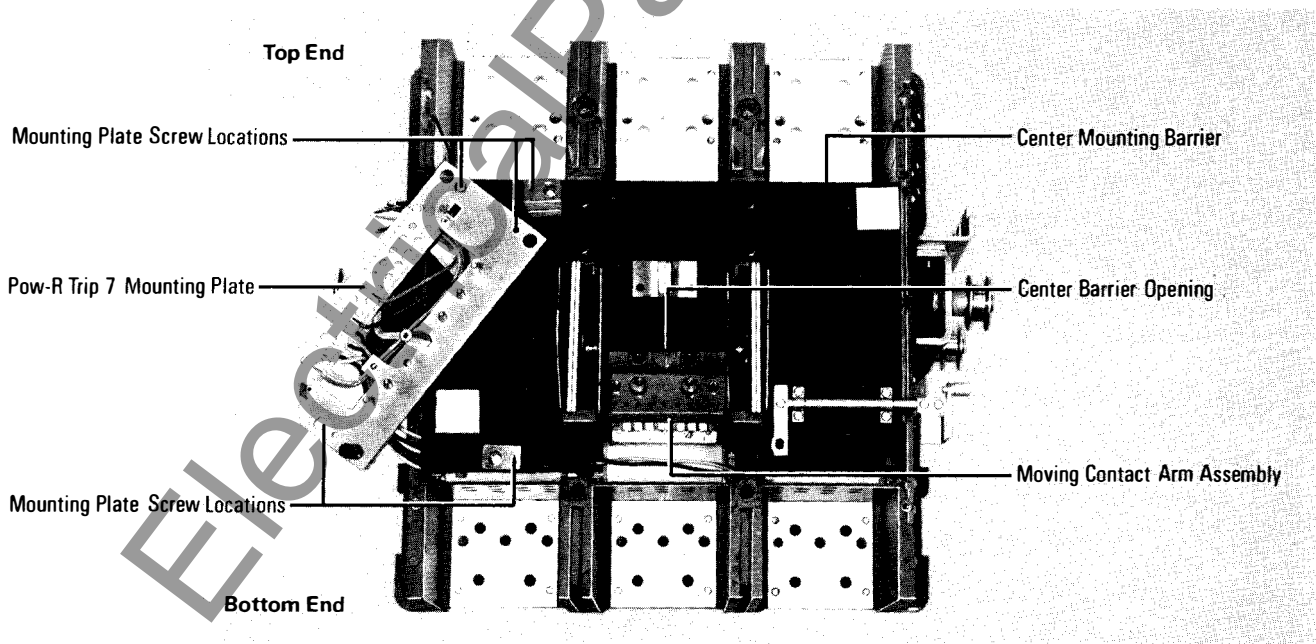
1600 Amp Breaker With Operating Mechanism Removed and Pow-R-Trip 7 Mounting Plate Pivoted to The Side.
